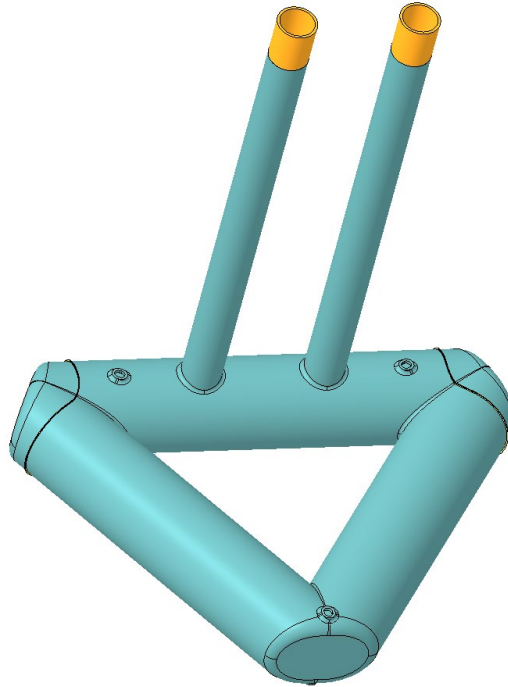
Tube Hydrogen Vessel Welded with 2 welds joining caps to body. Welds are designed to be electron beam welded in 2 passes. Each pass is a $\frac{1}{2}$ rotational tube weld followed by a translation to join to the other $\frac{1}{2}$ tube weld.
